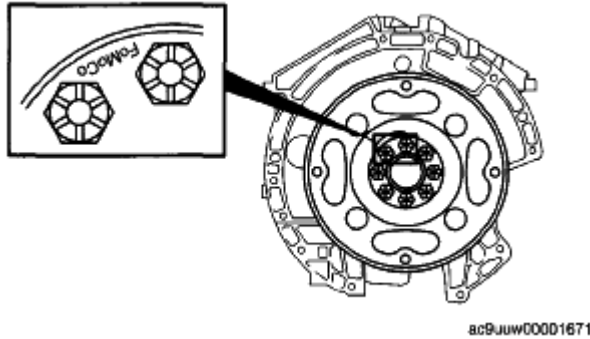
Identifying Drive Plate Logo Mark Faces Upward
